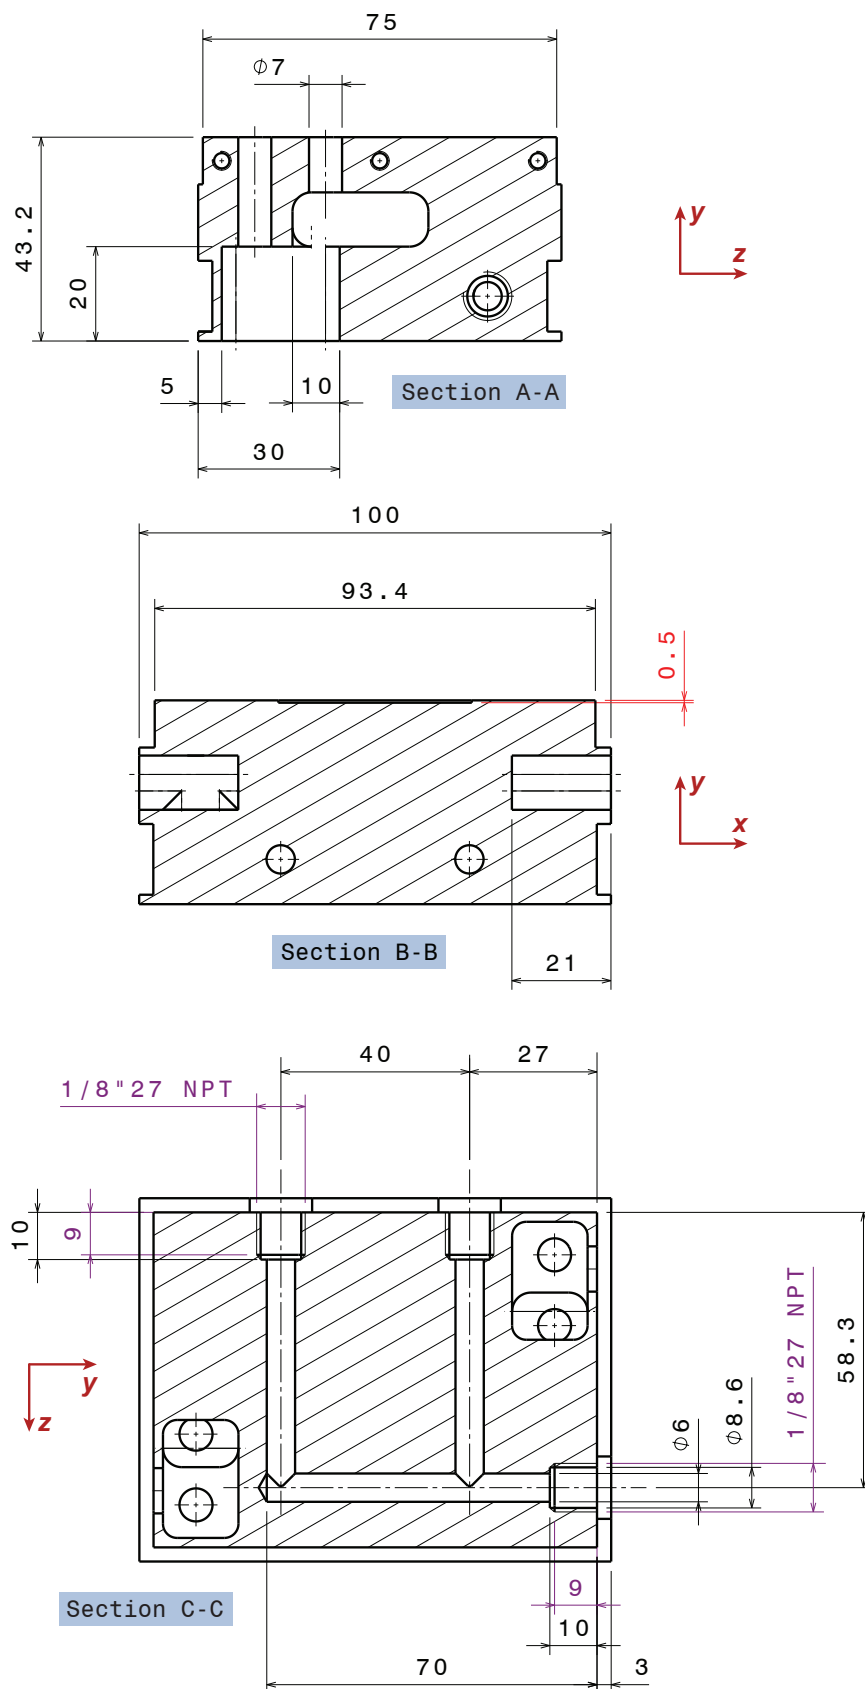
TA support: base unit CAD part 3/3 – sections marked in the previous drawings in fig C.4 and fig. C.5.
